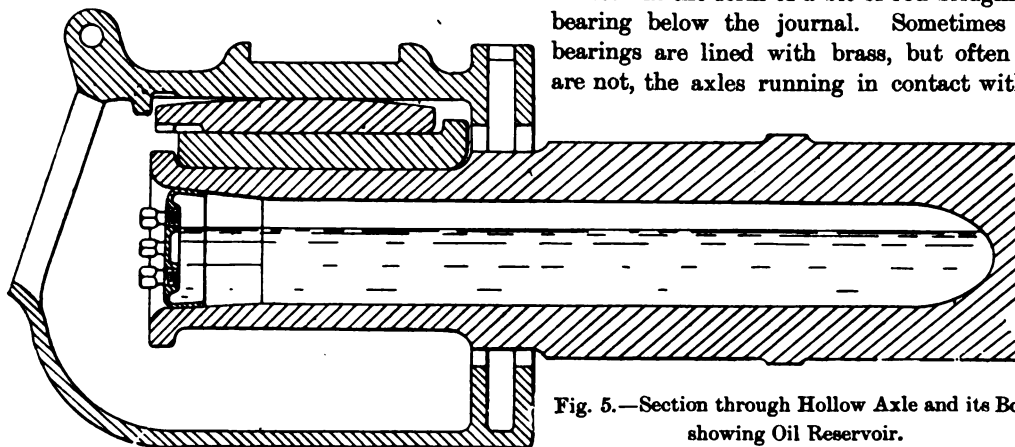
Section through Hollow Axle and its Box, showing Oil Reservoir.
